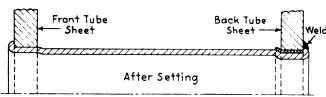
Bead at the back tube sheet as welded after the locomotive has been fired up and tested
